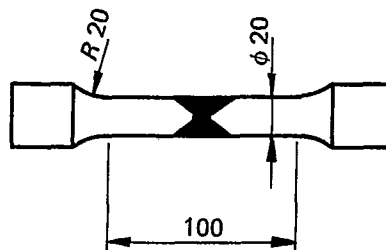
Dimensions of prepared test piece (cast iron)
